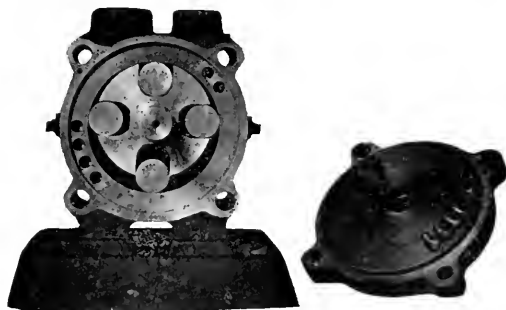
ENGINE WITH CYLINDER HEAD REMOVED.
